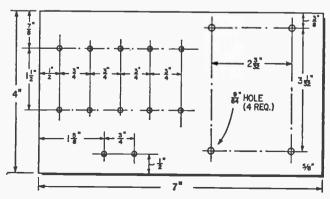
Front-panel layout is for a 4- by 7-inch sloping-front cabinet. The four 9/64-inch holes on the right must be marked and drilled accurately to mate with tapped spacers. Tubular-type spacers allow more sideplay but assembly becomes a bit more difficult. the perf-board with 6-32 machine screws.
